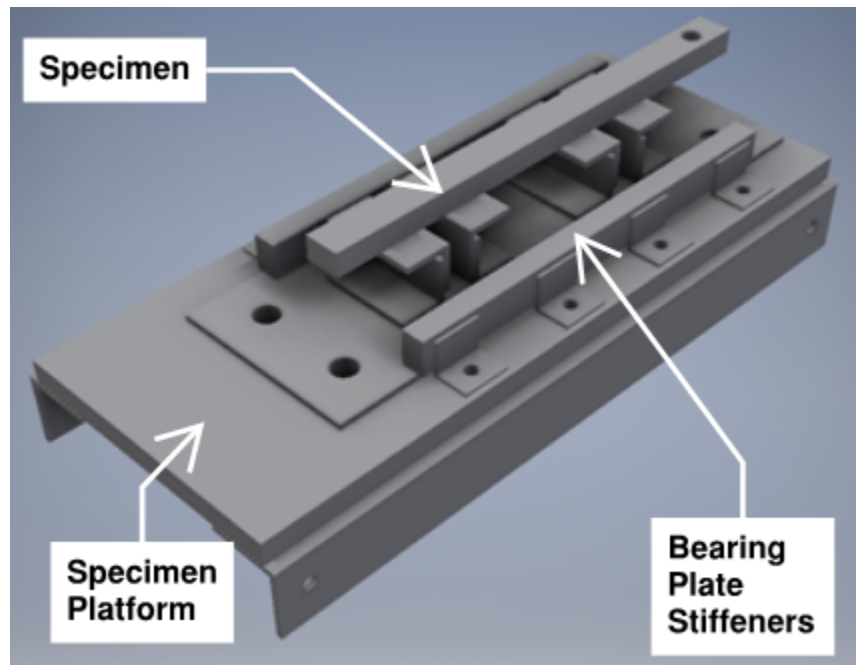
Specimen Platform Shown Loaded With a Specimen and the Bearing Plate Stiffeners Attached
